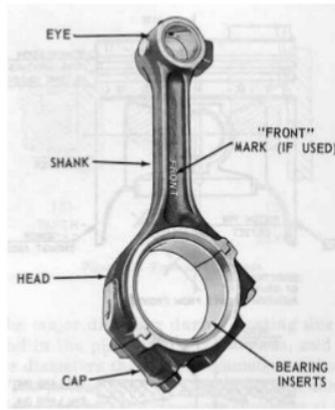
3-Dimensional View of Connecting Rod Showing its Components
